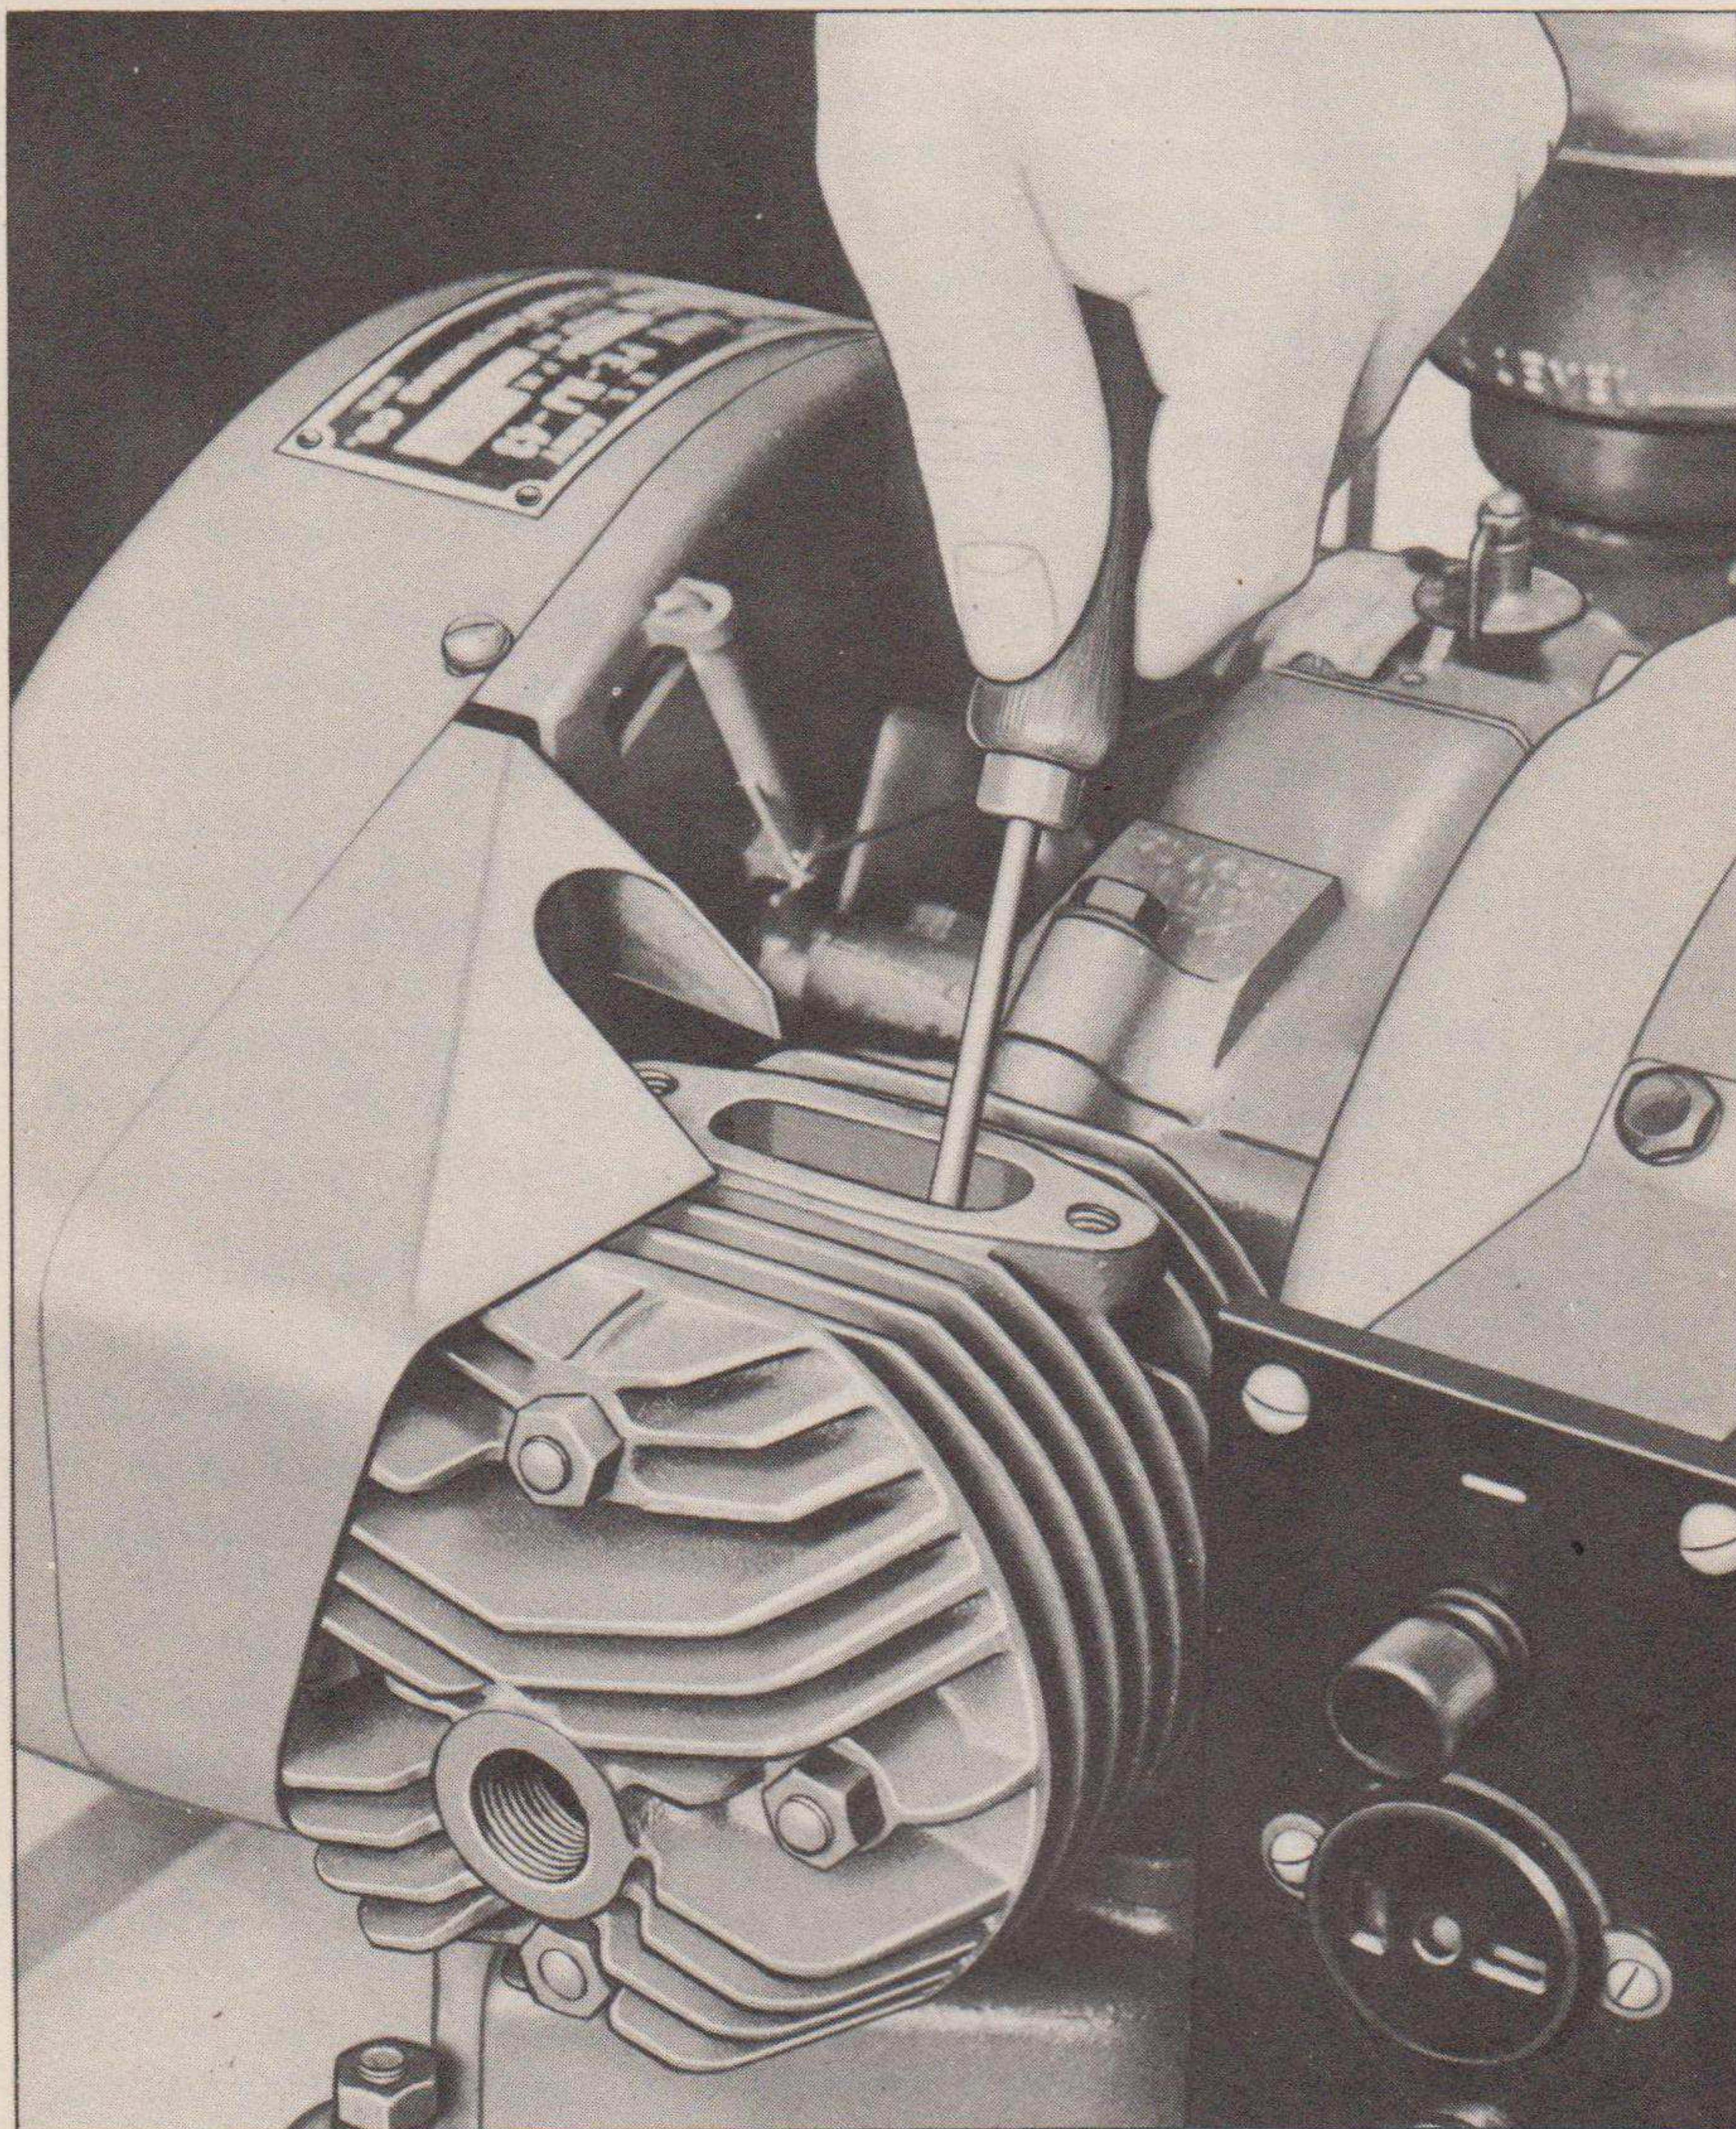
CARBON REMOVAL—EXHAUST PORTS
